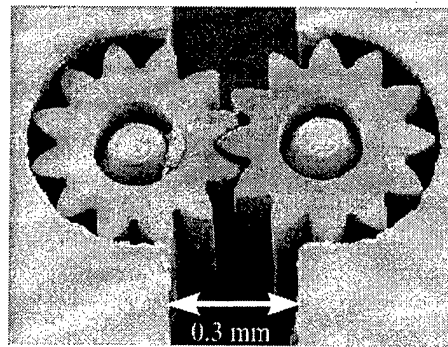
Demonstrator of a gear pump with circular wheels  $\varnothing 0,6 \times 0,5\text{ mm}^2$
